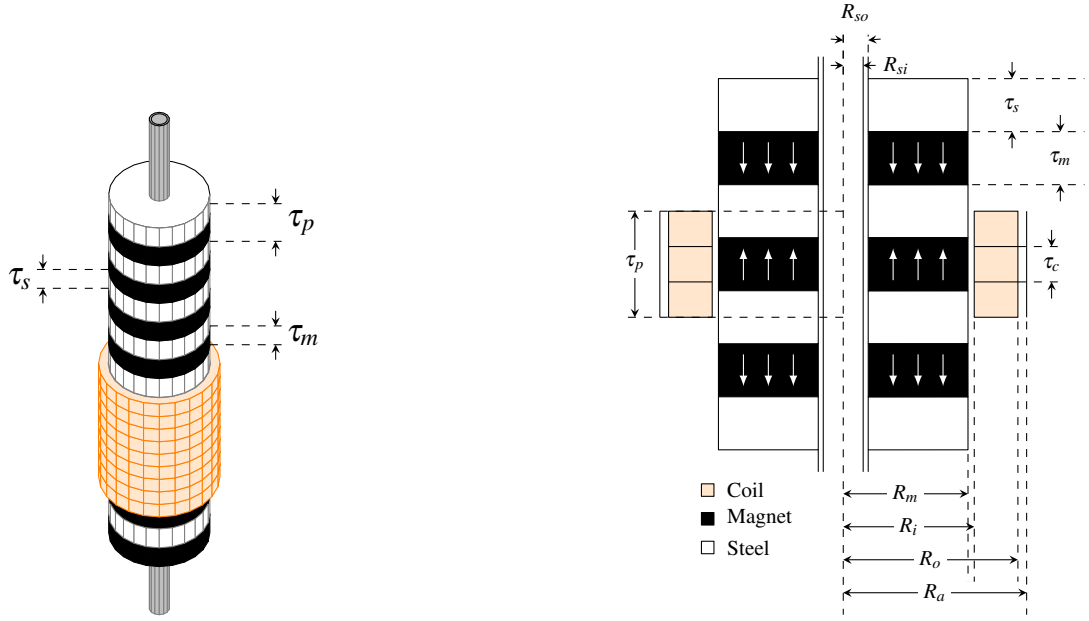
3D view of the ACTM and cross-section of machine with dimensions.
